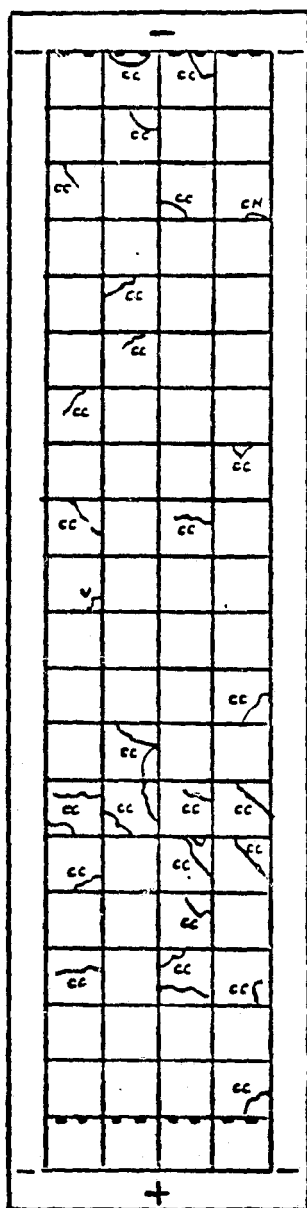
Inspection Record of First Module Solar Blanket (S/N 01) After Assembly
